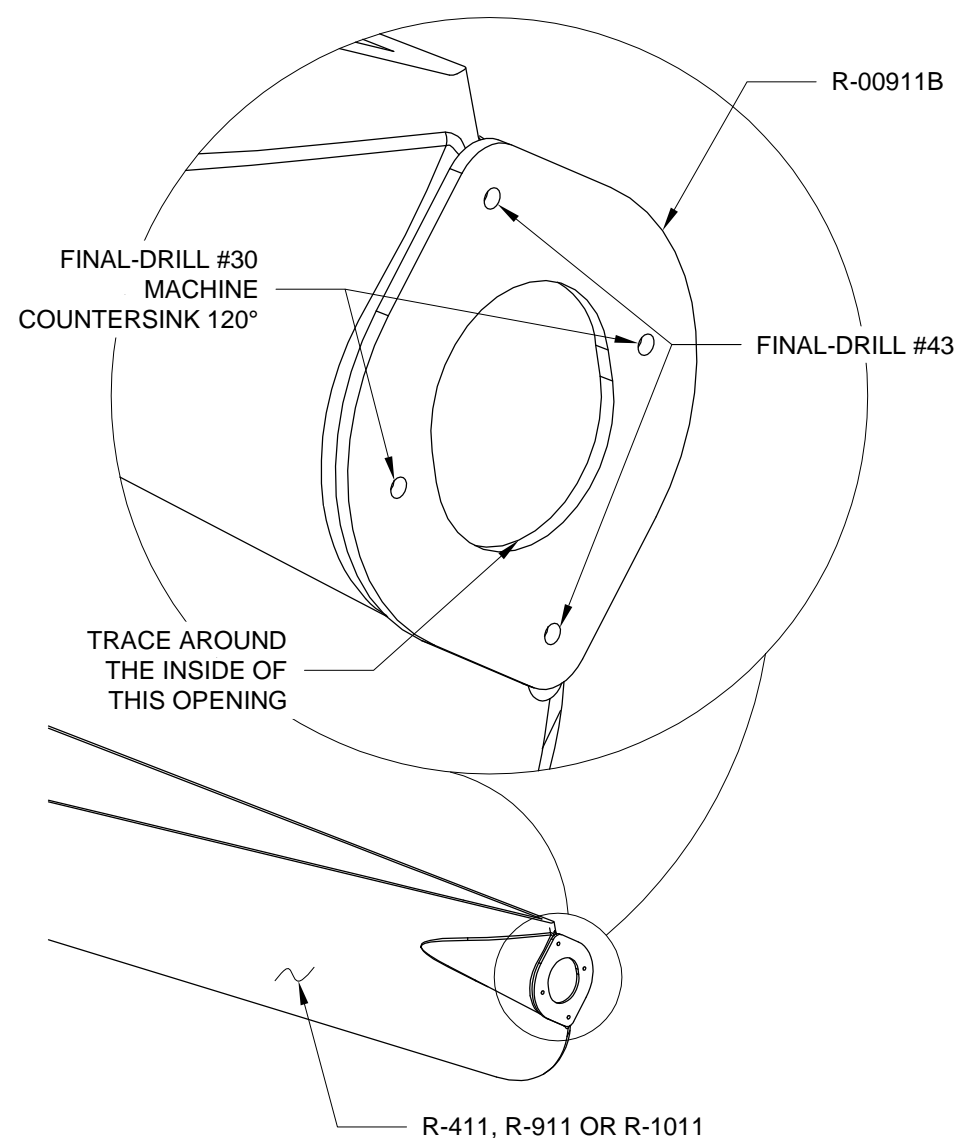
FITTING THE RUDDER FAIRING DOUBLER
